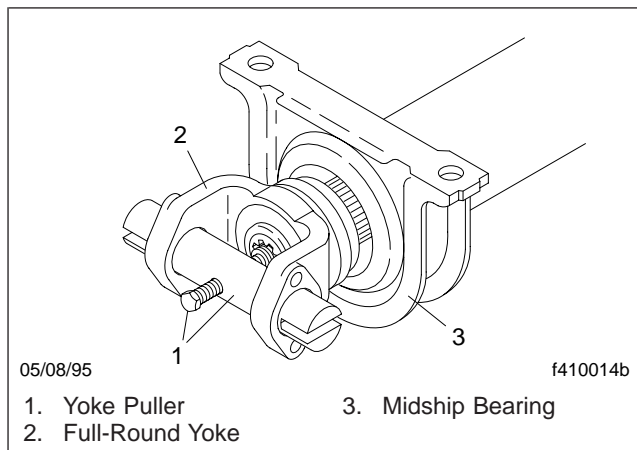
, Remove a Full-Round End-Yoke from a Coupling Shaft
